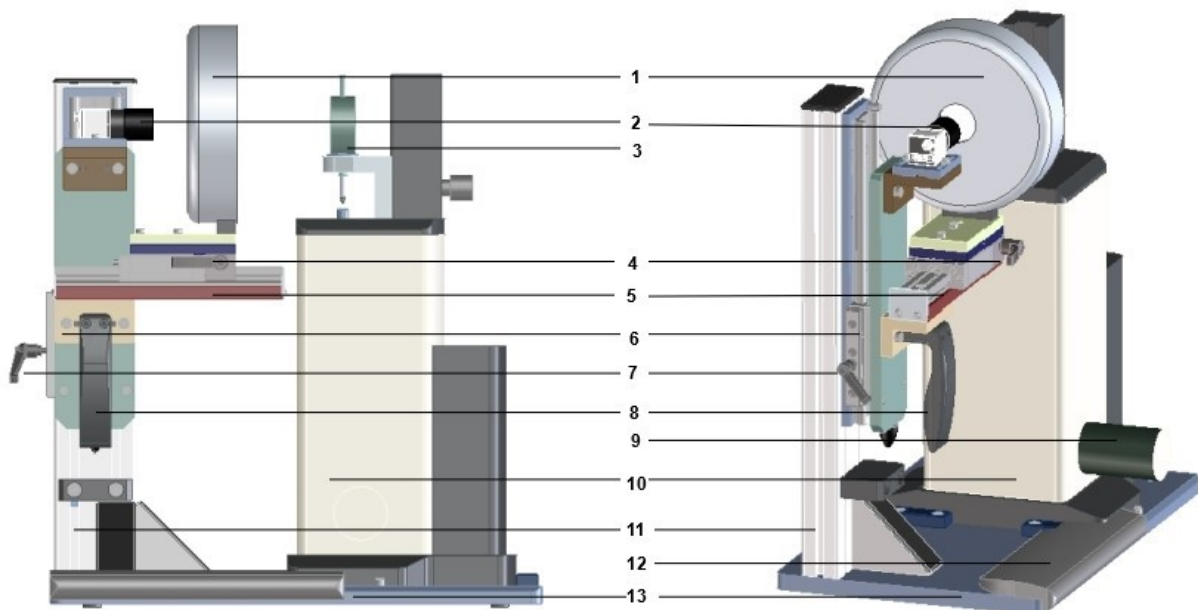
Base unit with mounted dial indicator testing device.
